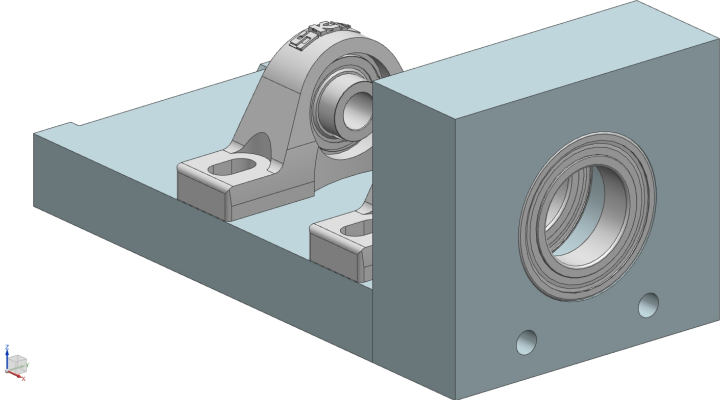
External fixture, including SKF 6008-2Z bearings and SKF SY 15 TF bearing units.
